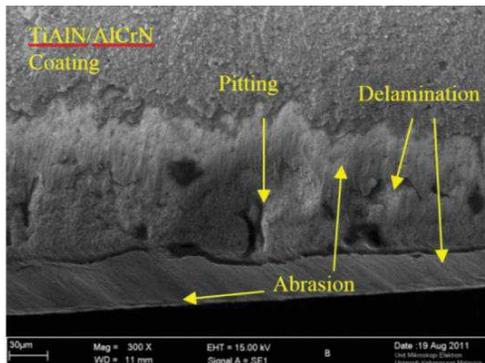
Several failure modes during machining of Inconel 718.
